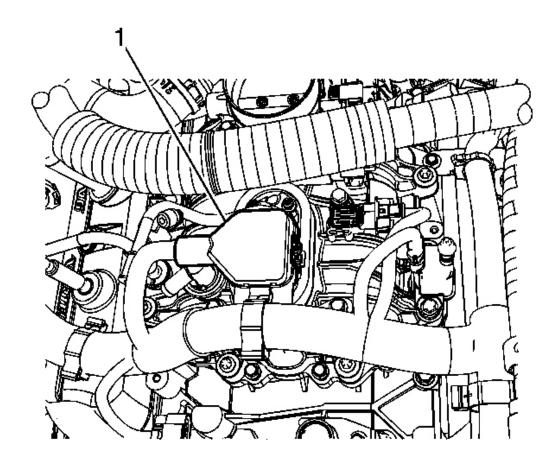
Control Port Injector Module Courtesy of GENERAL MOTORS CORP.
